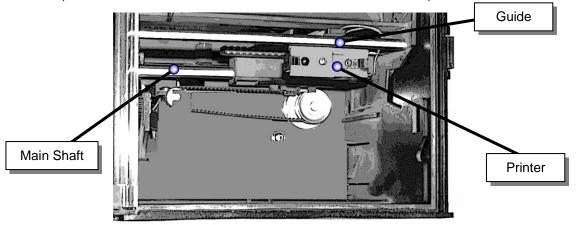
Layout of Guide Shaft, Printer and Main Shaft
